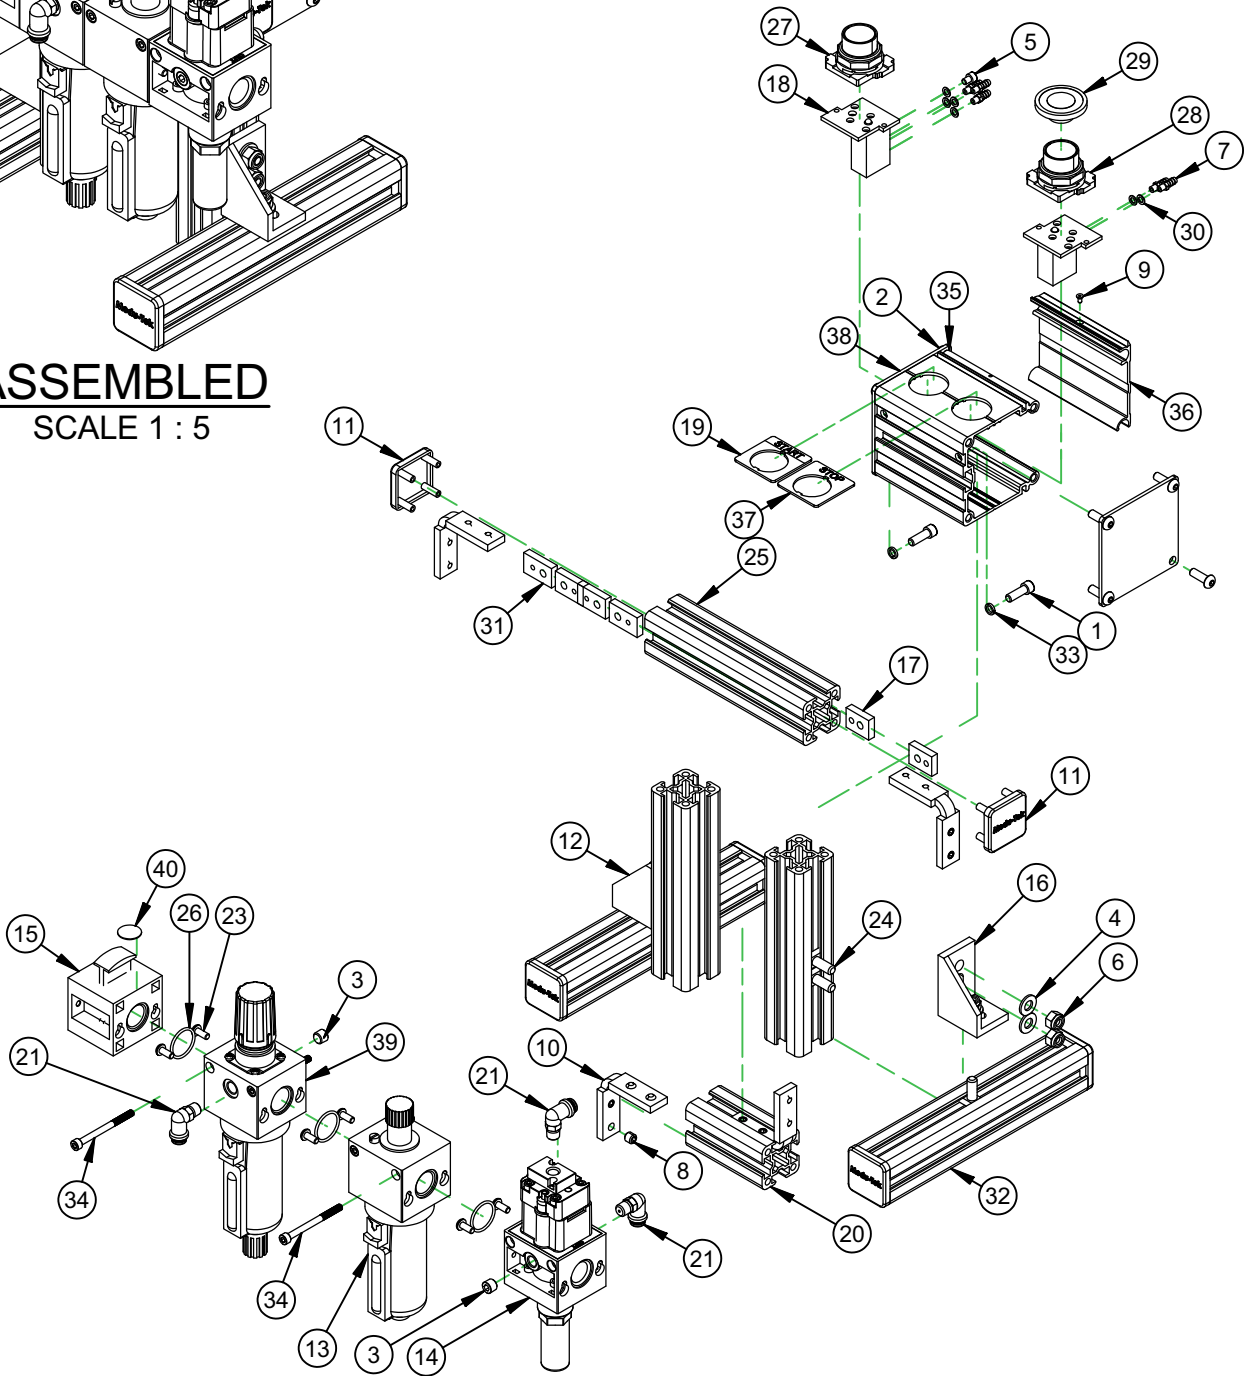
PNEUMATIC CONDITIONING UNIT ASSEMBLY (P/N 78264)
